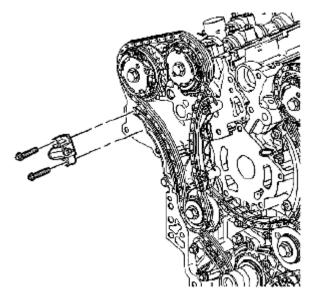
Identifying Right Bank Secondary Camshaft Drive Chain Tensioner Courtesy of SUZUKI OF AMERICA CORP.
